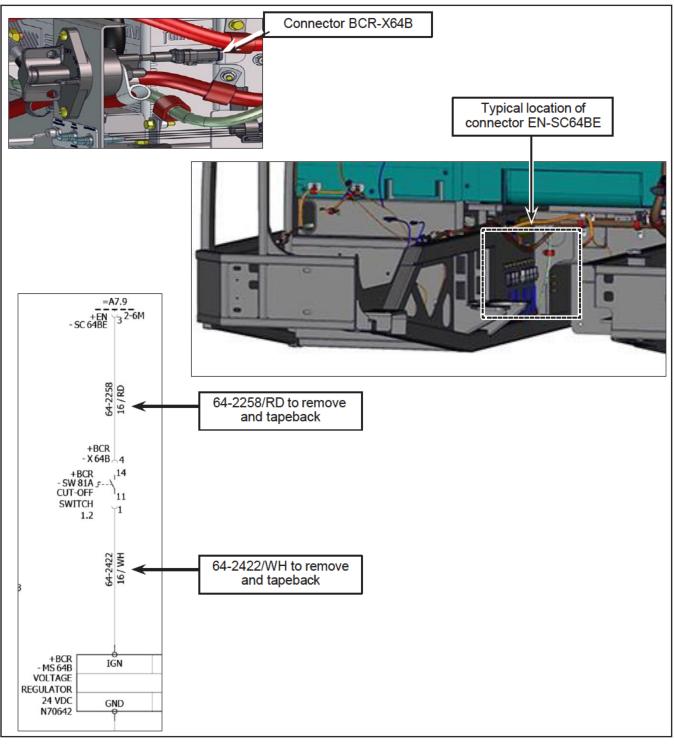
Wire 64-2258 and 64-2422 to Remove
